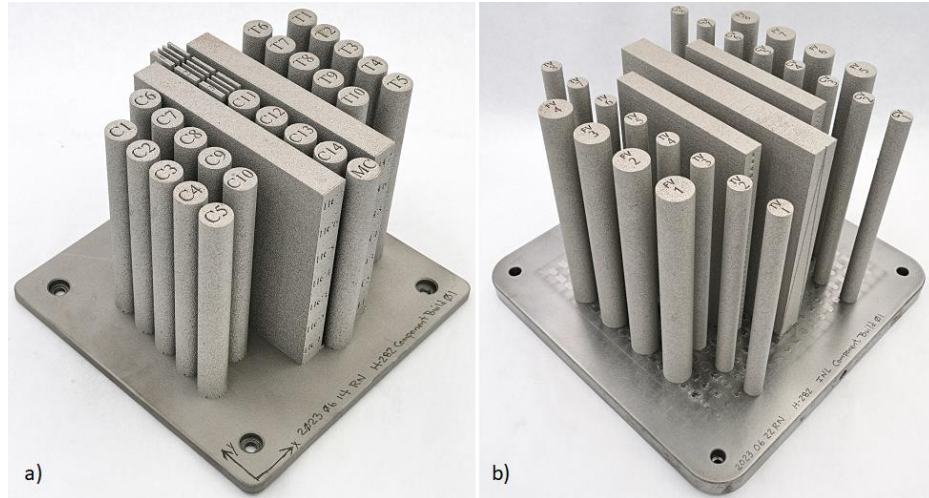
LPBF builds of mechanical test specimen blanks; a) ORNL build and b) INL build.
